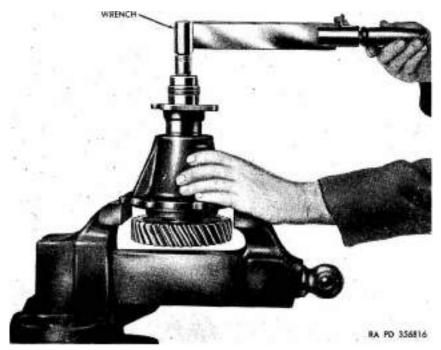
Checking preload of bearings on output shaft with torque indicating wrench.
